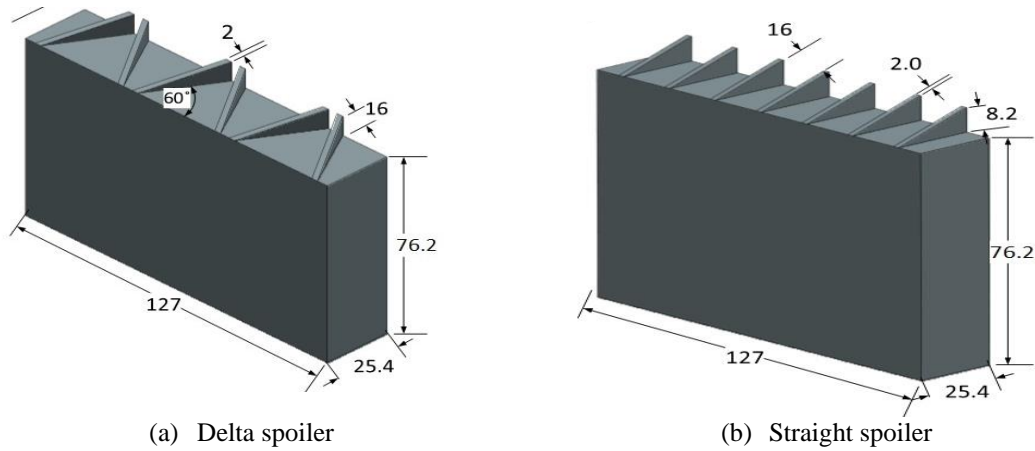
3D drawing of the delta and straight spoiler edges (all dimensions are in mm)
